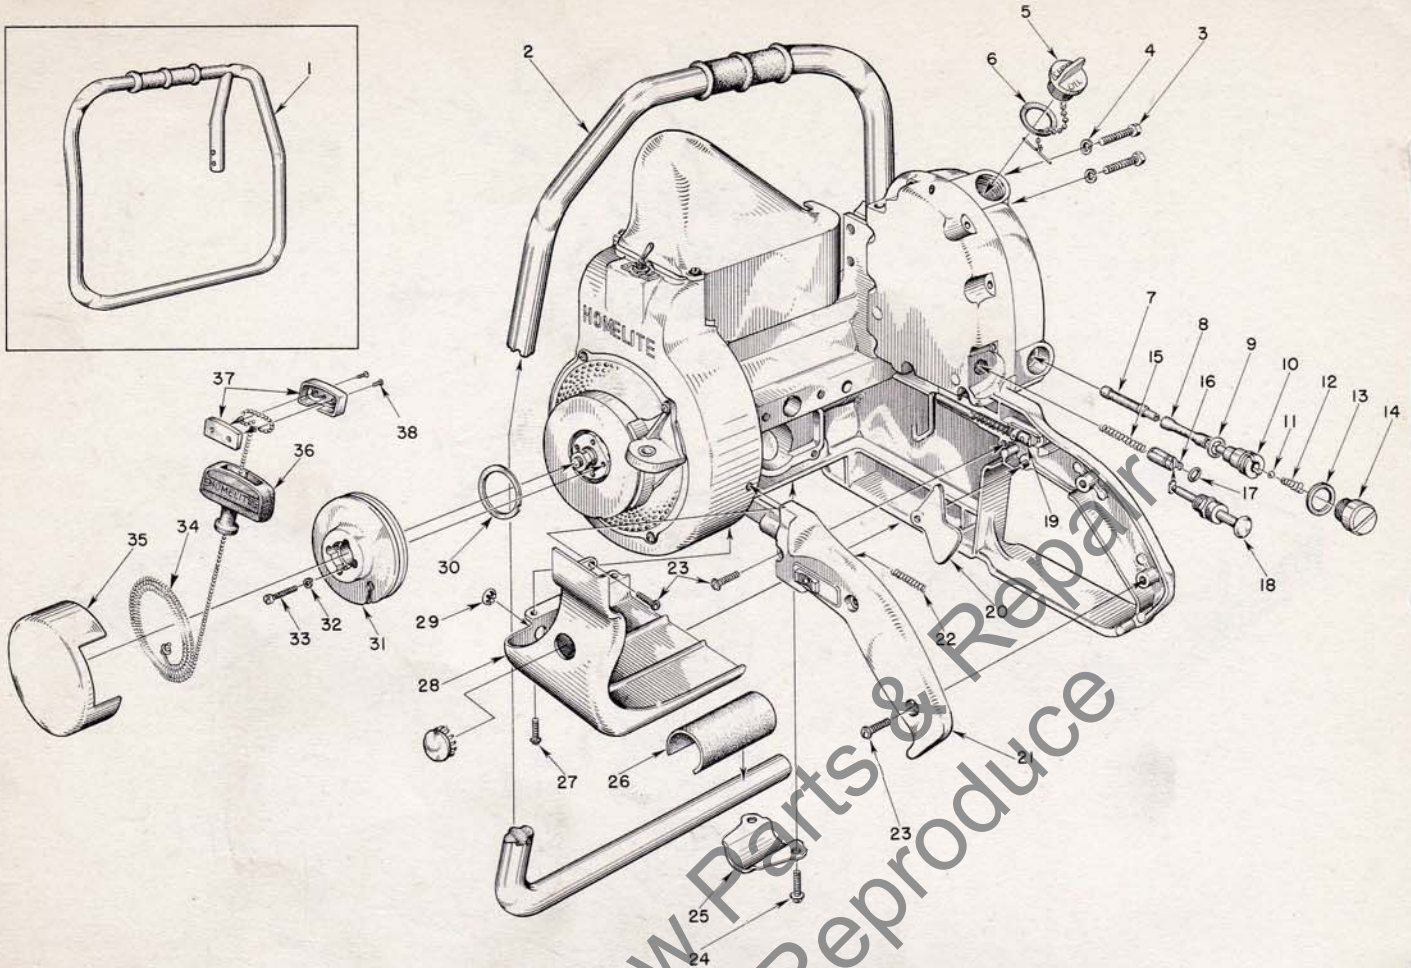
STARTER, HANDLE, GRIP AND LUBRICATOR PARTS
